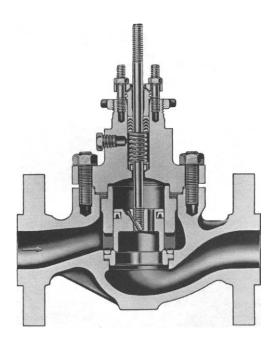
Cage-trim globe valve with balanced cylindrical plug Courtesy of Emerson Process Management
